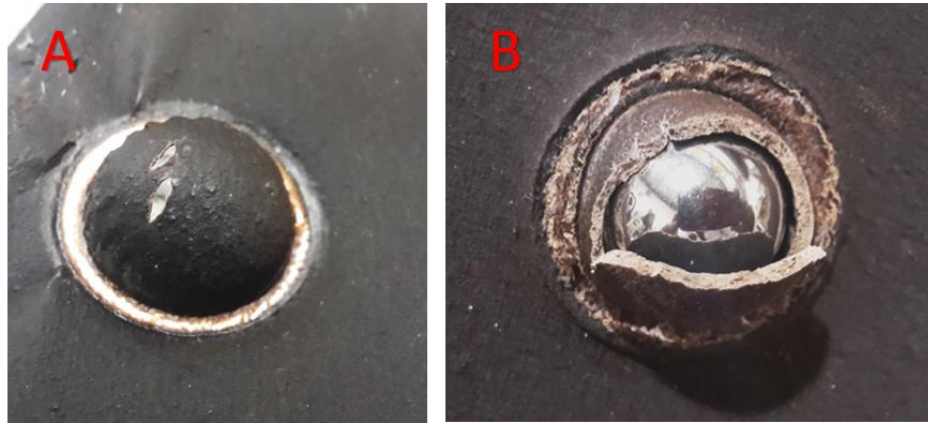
Failed feasibility welds with small ball bearing, thin sample (A), thick sample (B).
